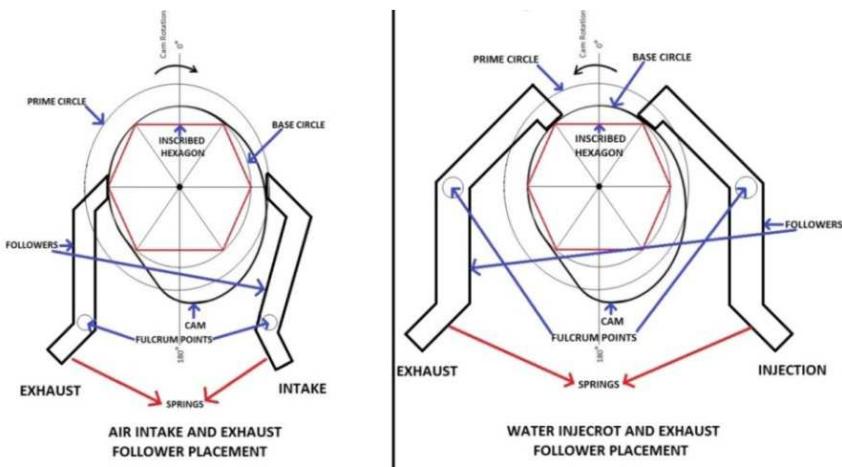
Rocker Arm Placement When Viewed from the Flywheel End
